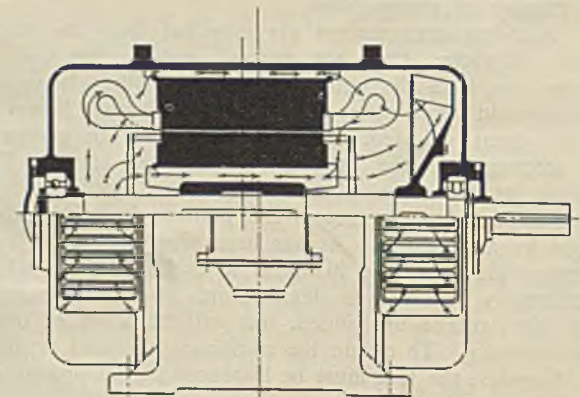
Sectional Drawing of Solid Frame Protected Enclosed Motor.
